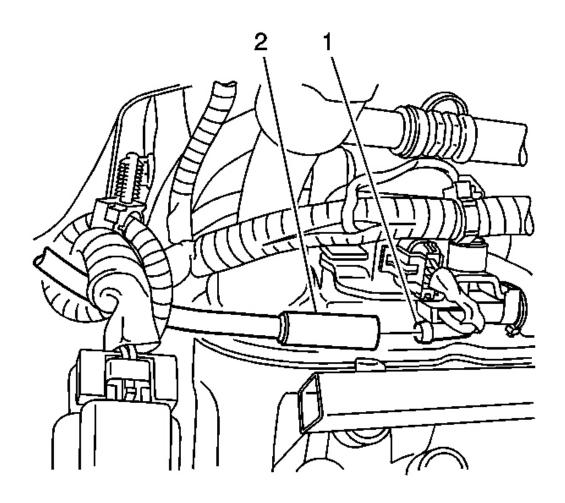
PCV Fresh Air Hose Courtesy of GENERAL MOTORS CORP.
